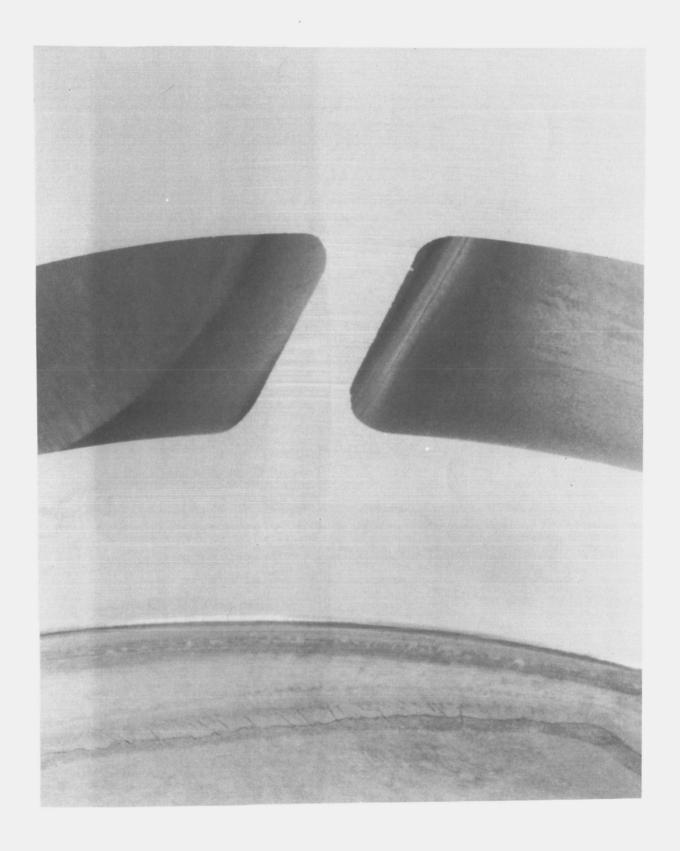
Final Simulated Impeller Sample Showing Close Up of Discharge Area After Core Removal
